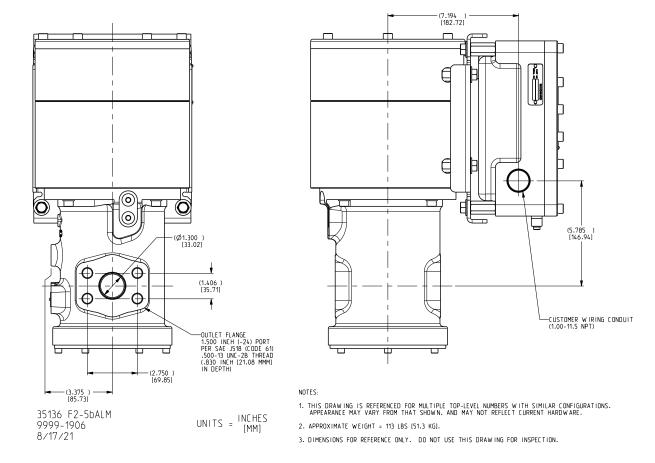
Outline Drawing Aluminum GS40 with Conduit Entries
